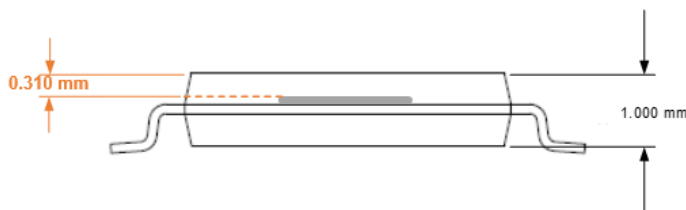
XtremeSense TMR Sensor Location in z Dimension for CT310 in TSSOP-8 Package
